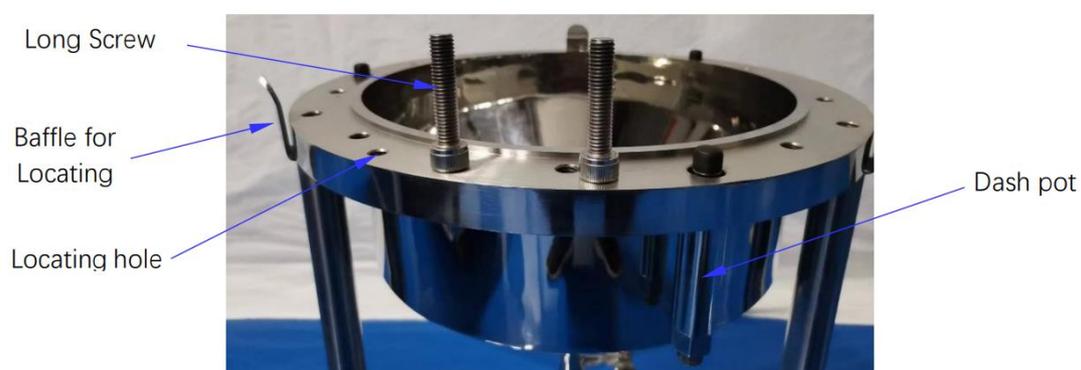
The screws must be put into the threaded holes on the upper and lower flanges
